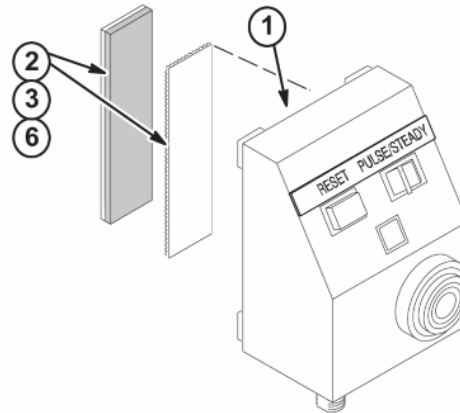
Control Box Installation On Wall Or Under Shelf
